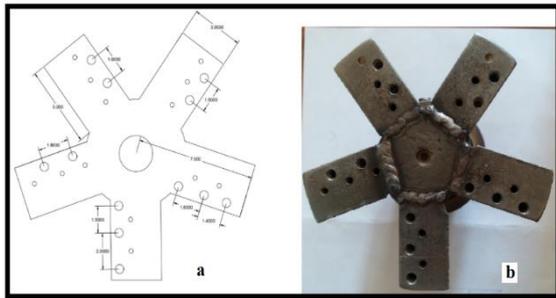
a) Two-dimensional view of the cutterhead drawn in AutoCAD, b) Constructed cutterhead.
